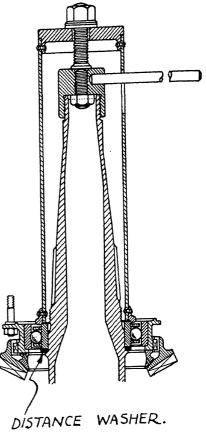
Assembling thrust bearings to stub arms with CHAMFERED FACE OUTWARDS.
